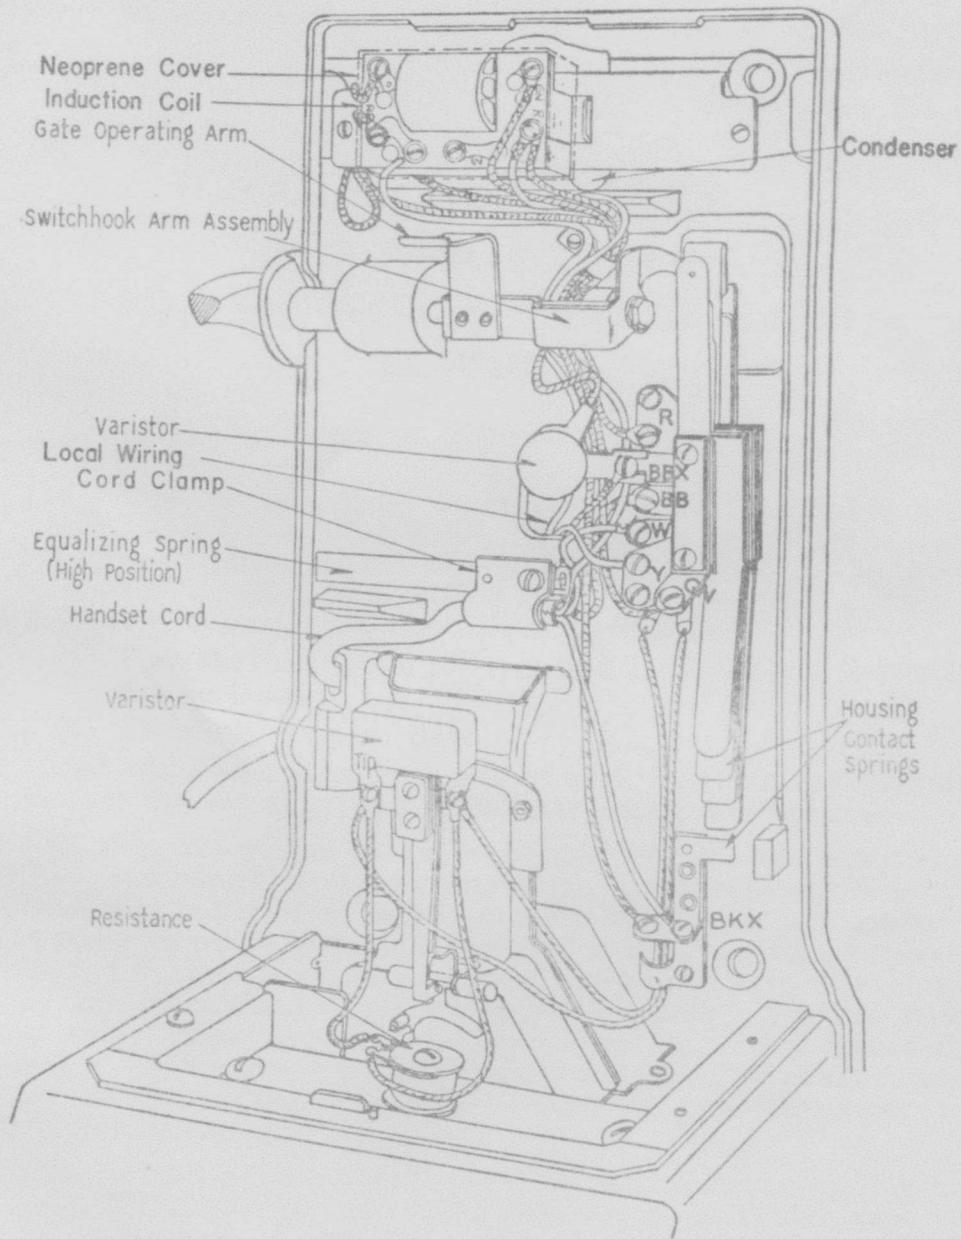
193-type Coin Collector—Lower Housing and Backplate
